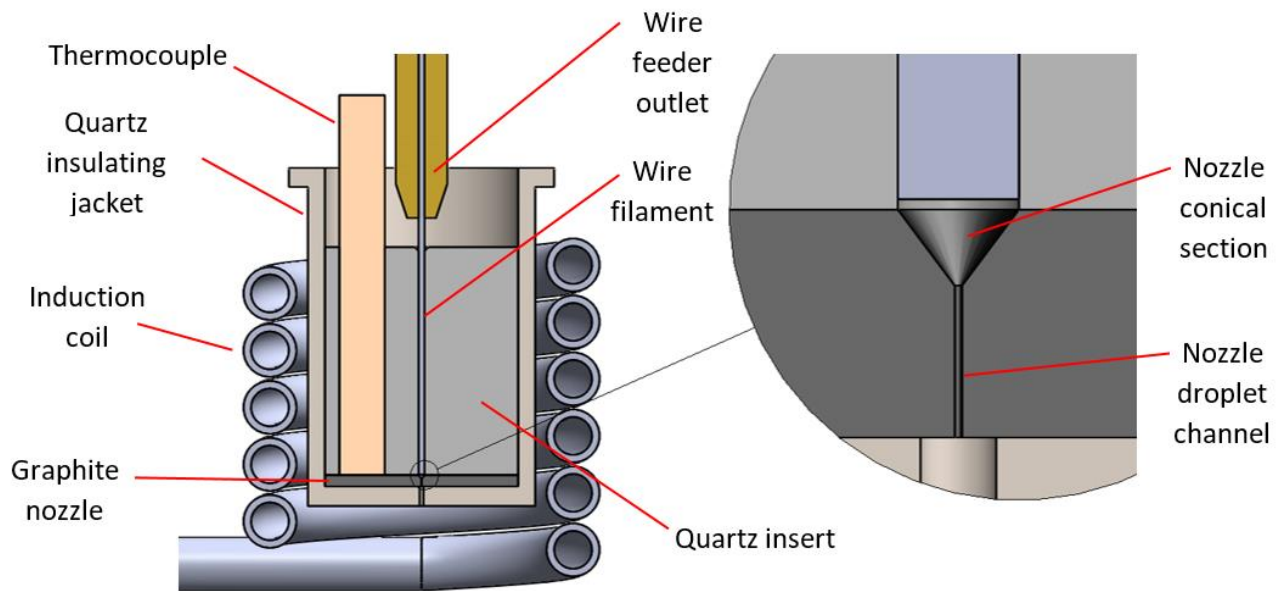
Initial printhead of the Novel DoD metal 3D printer. [104]
